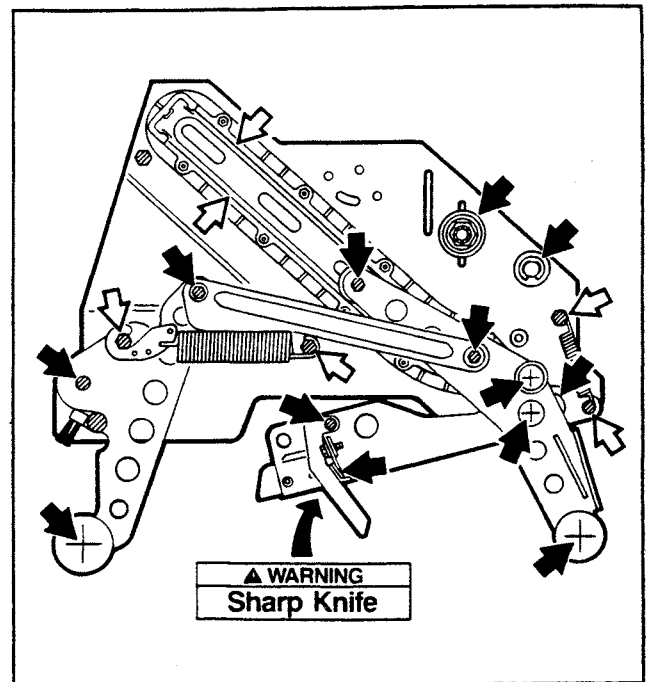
Lubrication Points - Upper and Lower Taping Heads
